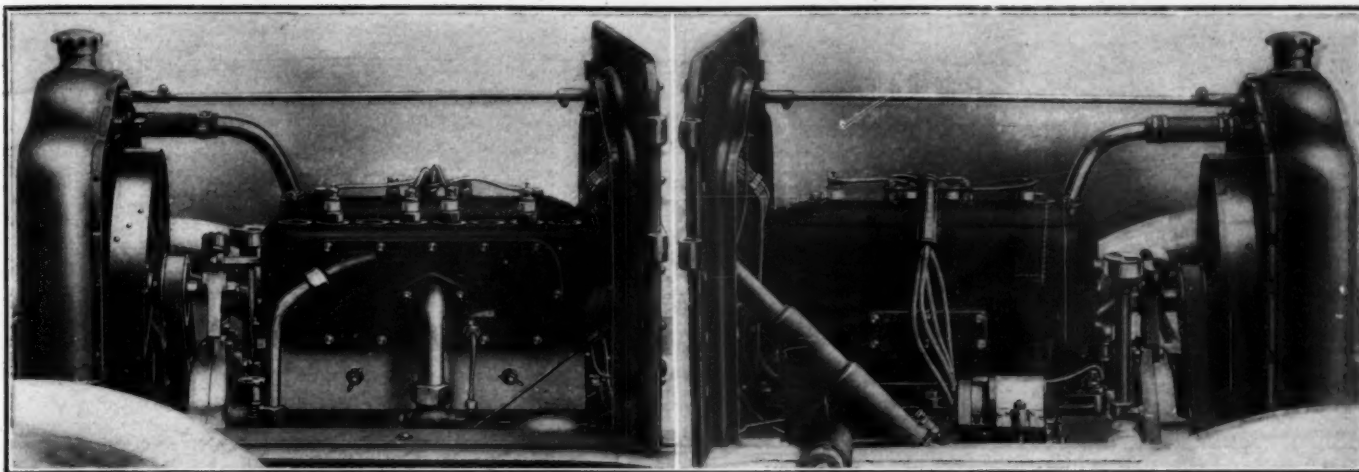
Left side of motor showing water connections, spark plugs, and freedom from complication. Fig. 2—Right side of motor showing location of magneto, simple and secure method of holding the high-tension wiring system, and how the steering post is fastened to the chassis frame with the shaft passing out above the line of the frame.
